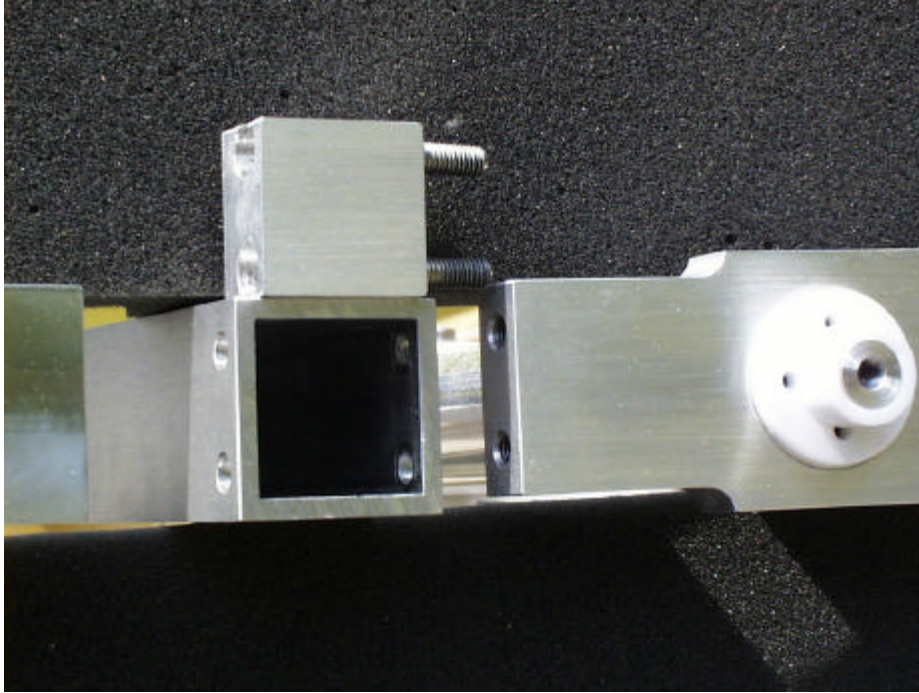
Front view on the LP-wing. The square shaped aluminium block is intended to connect the feed section to the LP-wing and to cover the square shaped tube. The INBUS-screws are placed inside the square block, which is then located inside the square shaped tube and fastened with the supplied INBUS-wrench.
